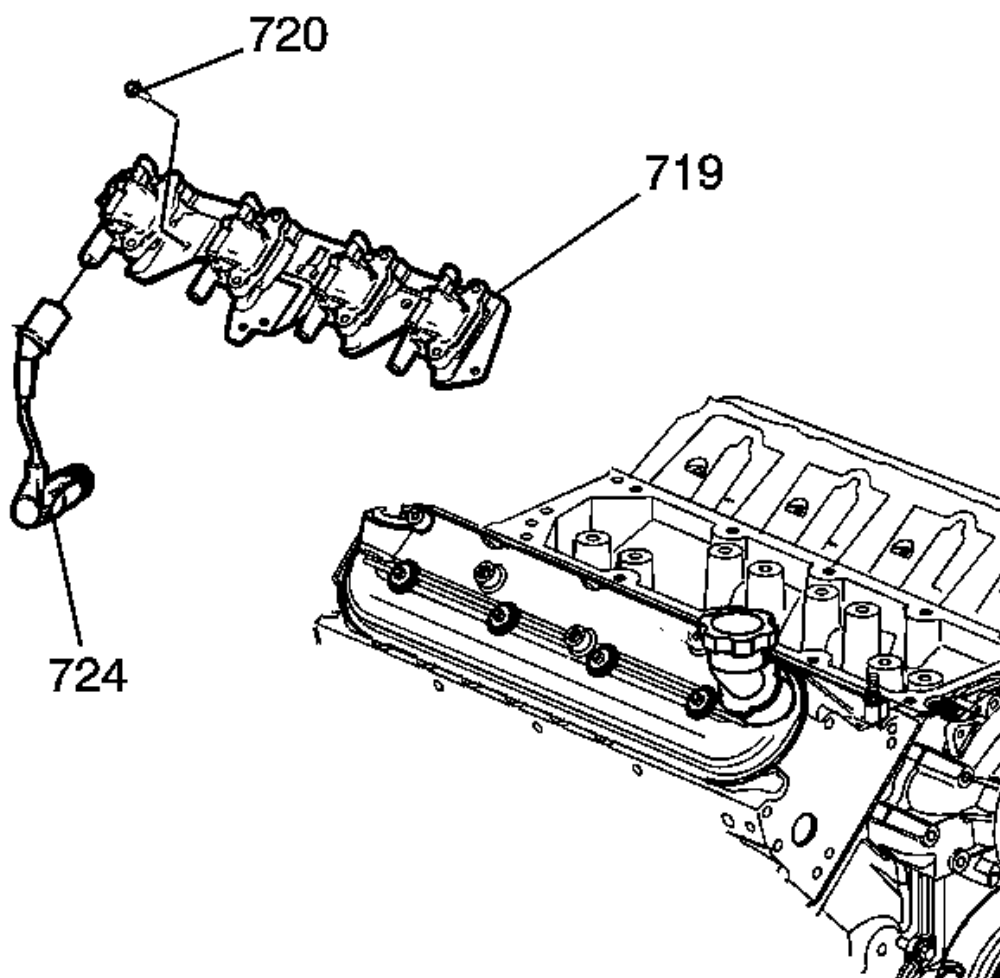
Identifying Right Valve Rocker Arm Cover Attachments
